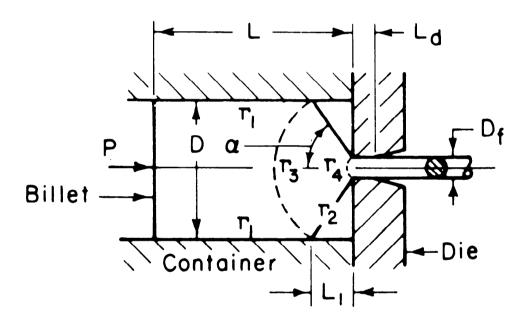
EXTRUSION THROUGH A SINGLE HOLE FLAT-FACE DIE
